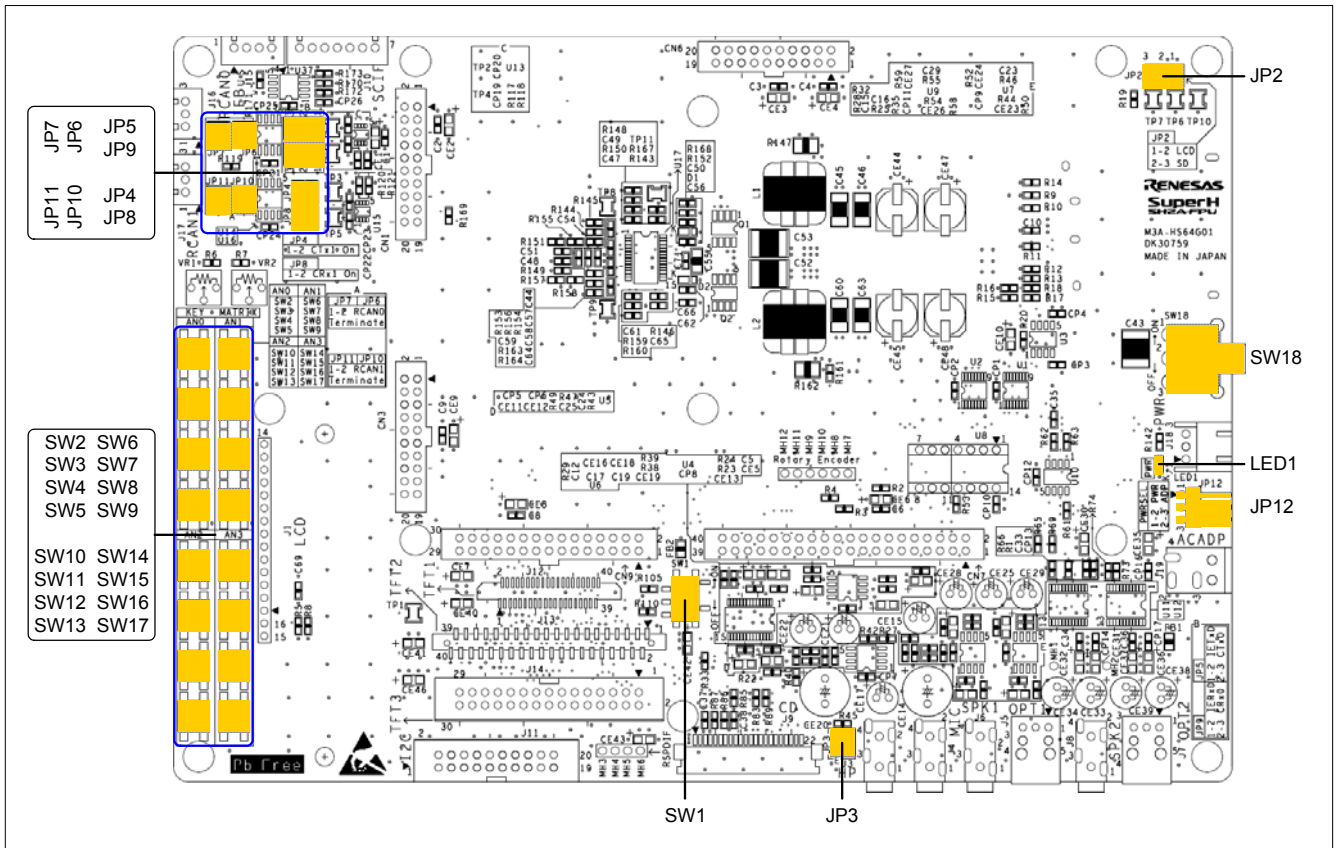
M3A-HS64G01 Operating Component Assignments (Top View of the Component Side)
